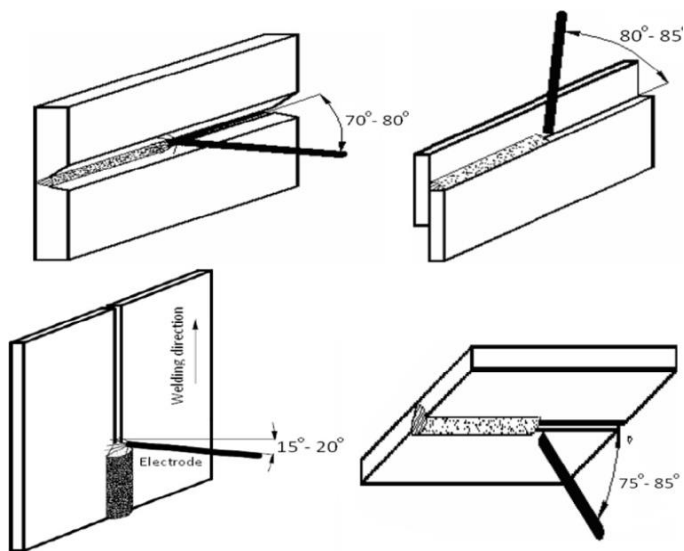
The schematic view of advance angles depending on welding position
